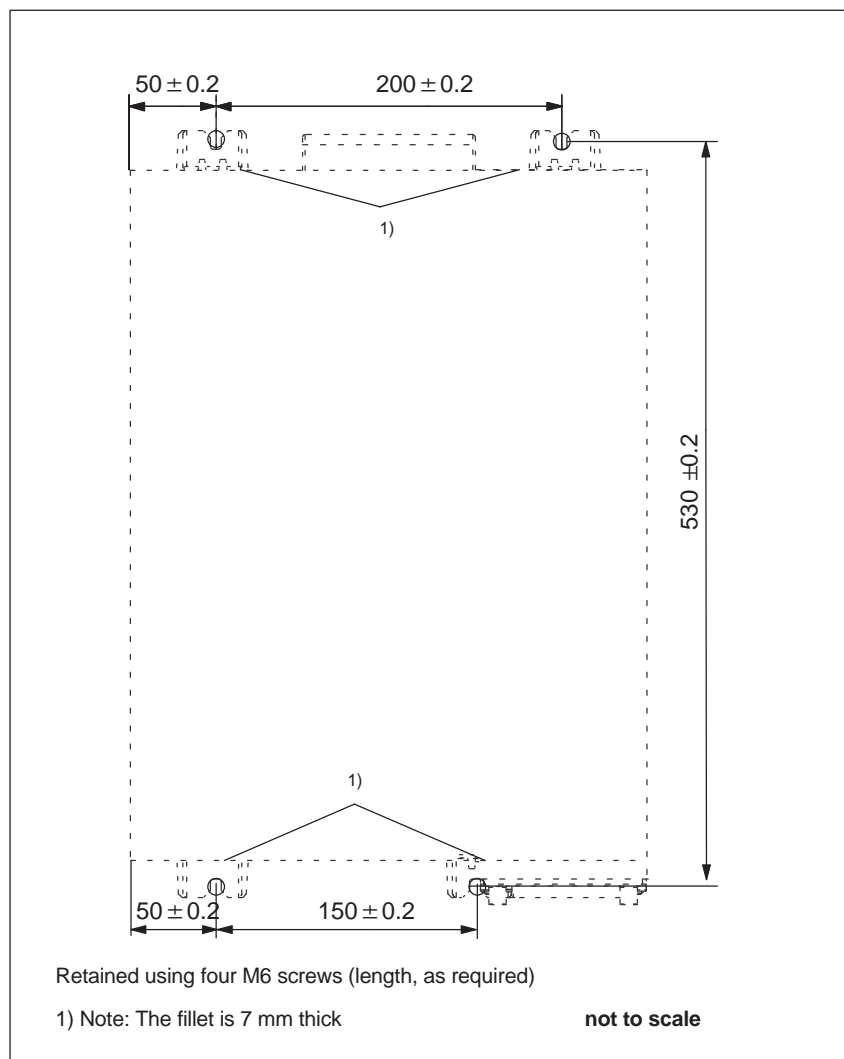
Hole dimensions, POSMO CA 9A and POSMO CD 18A
